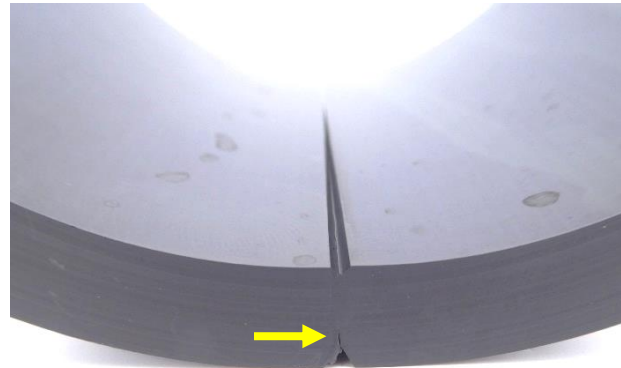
A non-failed notch at the top after testing a pipe in the horizontal container. A crack has started at the base of the notch (yellow arrow) and an indentation has formed on the inner pipe wall.
